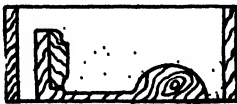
Filling the Drag; Loose Piece in Place.
